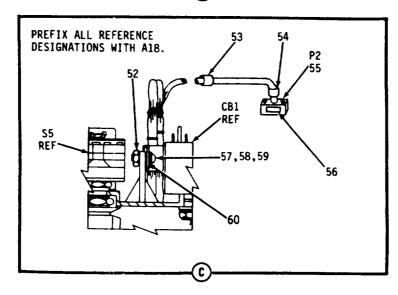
Control Panel Assembly (Sheet 2 of 3)
